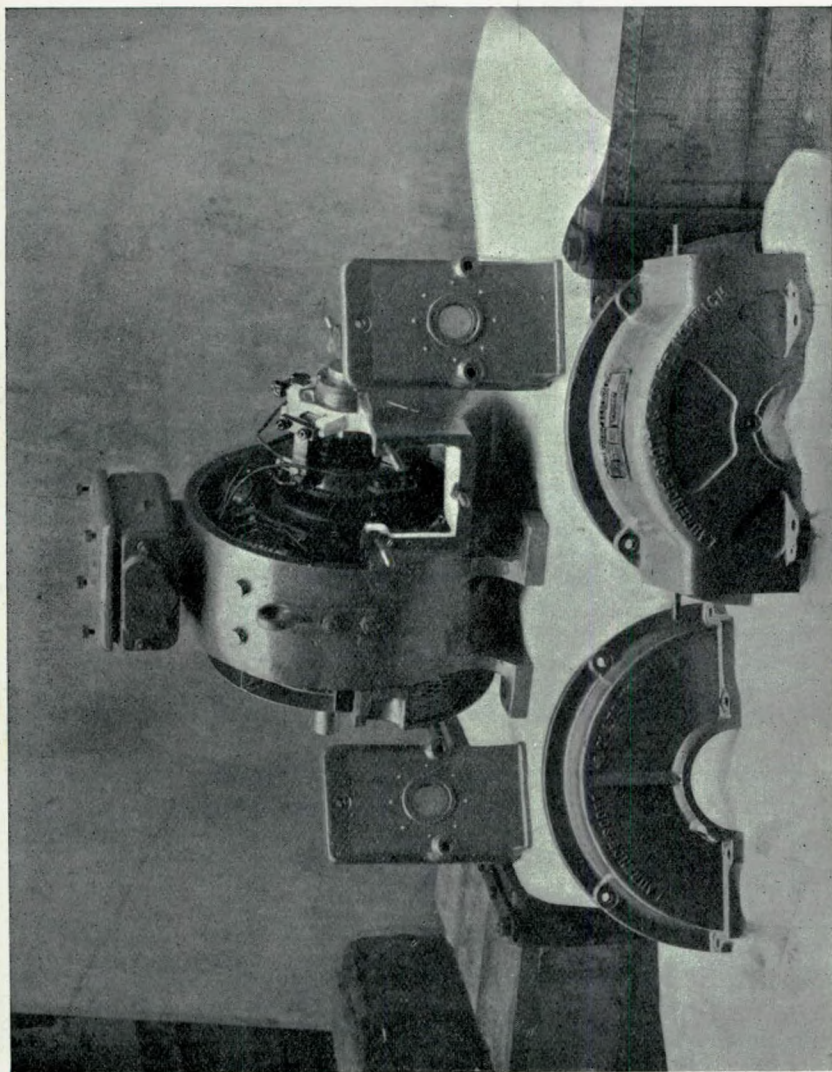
"Deluge" Type Motor, with top half of end bracket removed.
